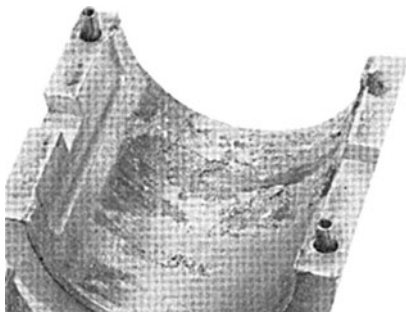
A sliding-element bearing failure in a high-speed gearbox. Excessive system vibration failed the bearing. Gear teeth did not fail, but they were close to failure.
